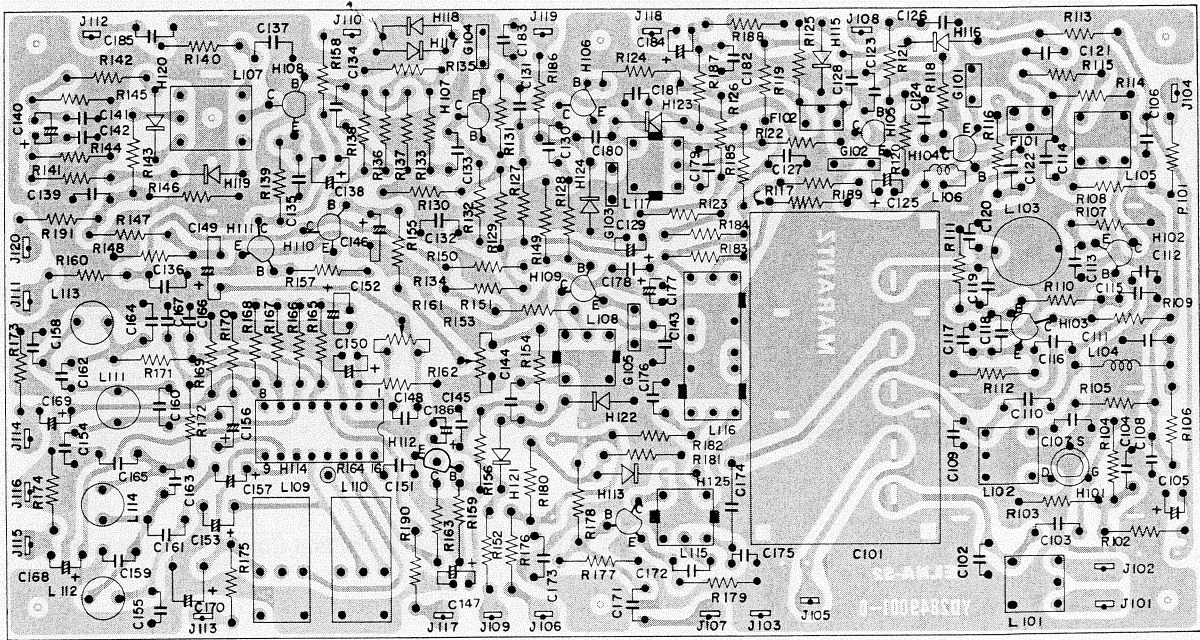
FM/AM Tuner Assembly P100 Component Locations
